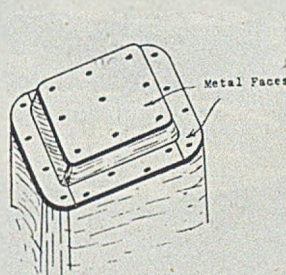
Sheet Aluminium or Brass applied to Flat Surfaces.
